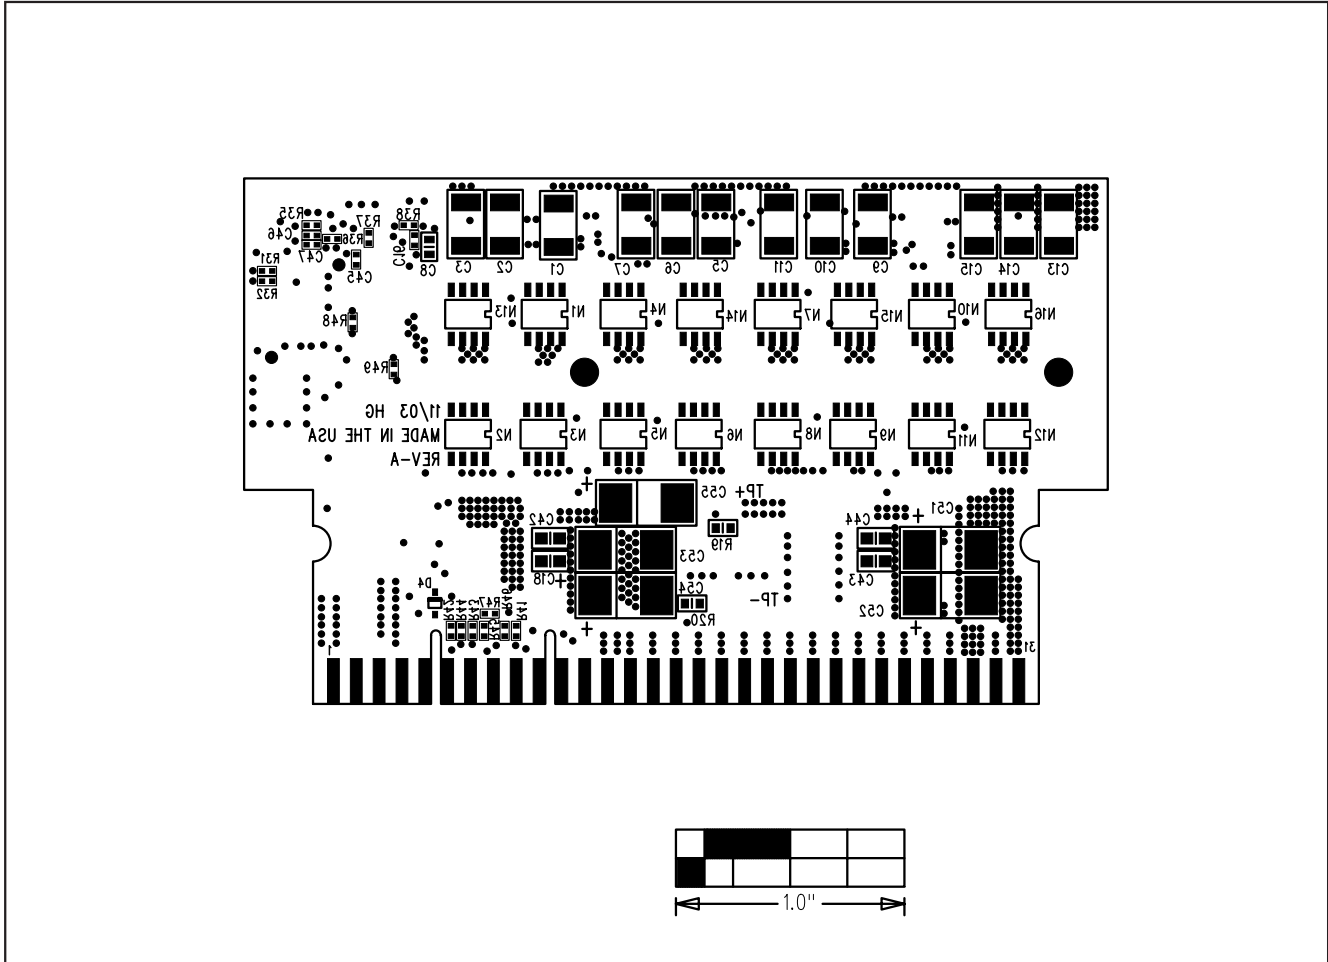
MAX8525 EV Kit Component Placement Guide—Solder Side
